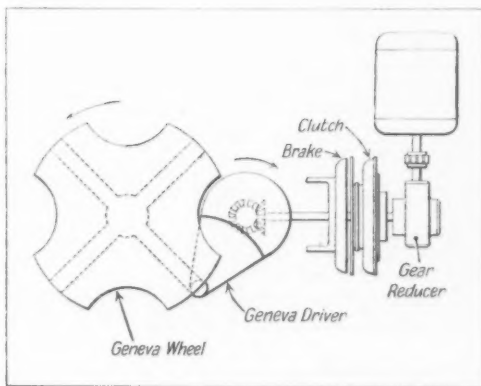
A Combination Clutch-brake Unit is Here Used to Control the Rotation of a Geneva Drive
